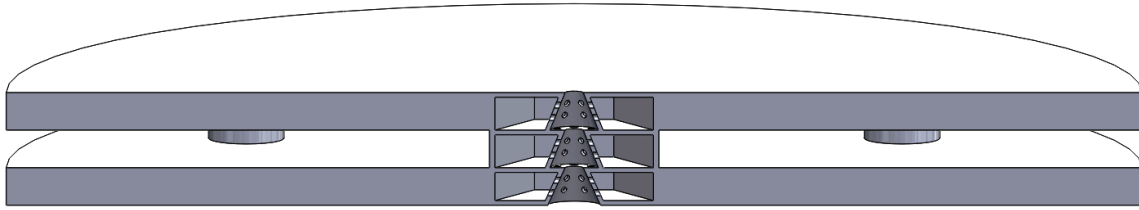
SISO - Quarter Inch Stages Downsizing Prototype - CAD
